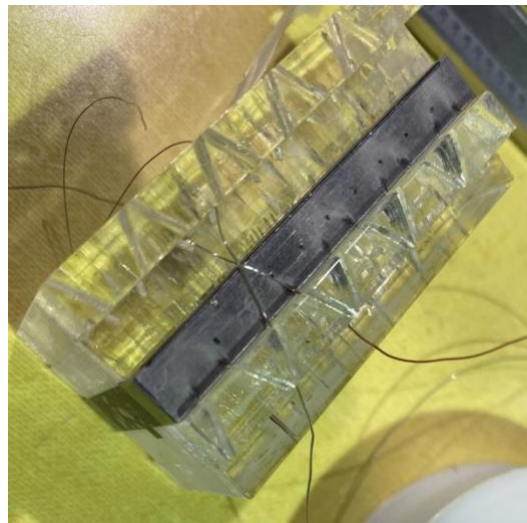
Fixtures for ensuring accurate location of thermocouple weld placement on the build plate.
